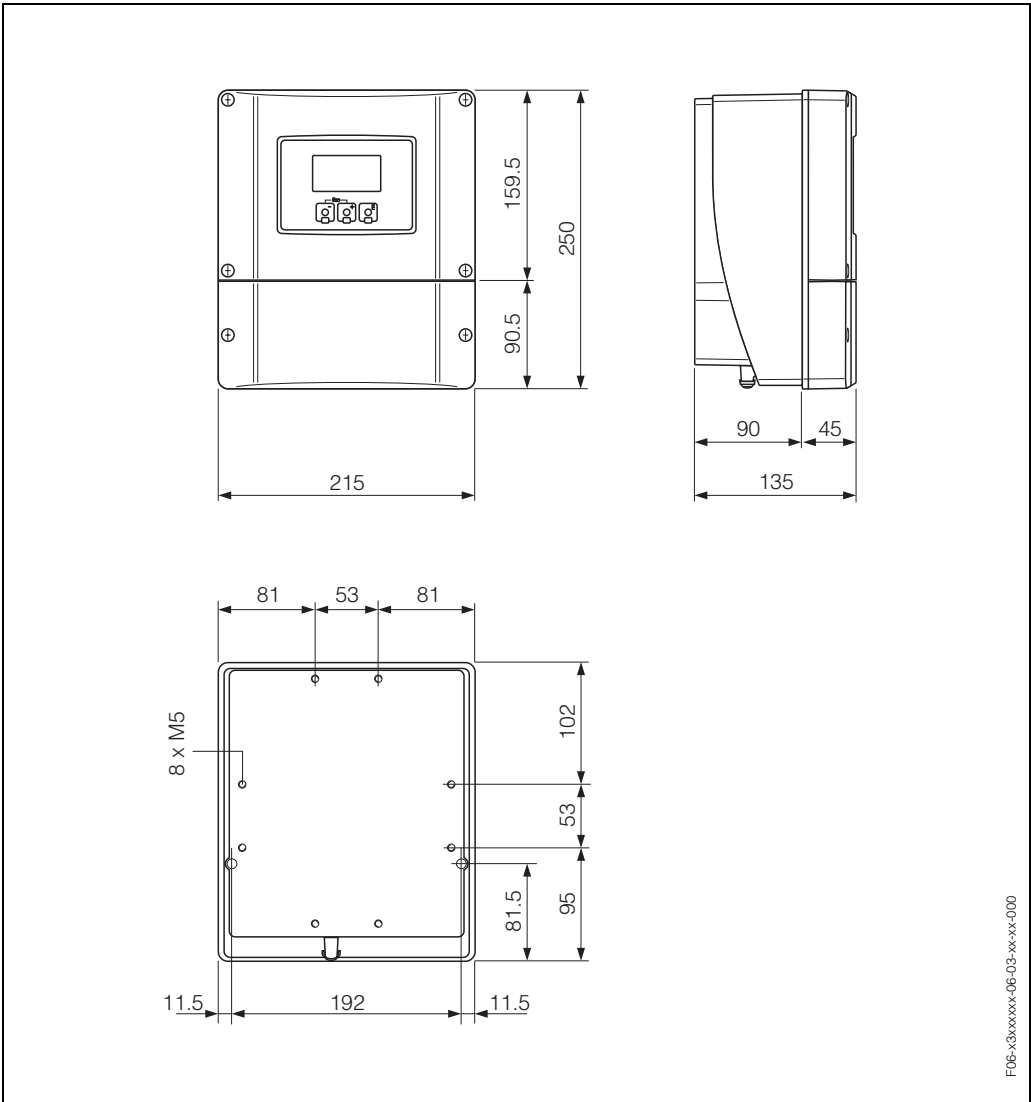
Dimensions wall-mounted housing (for panel installation and pipe mounting → Page 44)
